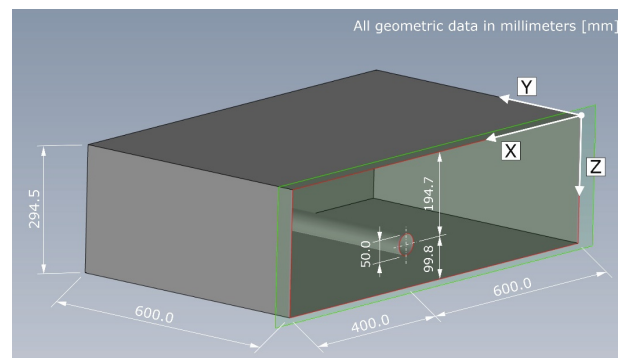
3D technical drawing showing the geometrical dimensions of the BAM reference specimen "Pk218" made of polyamide with borehole [20].
